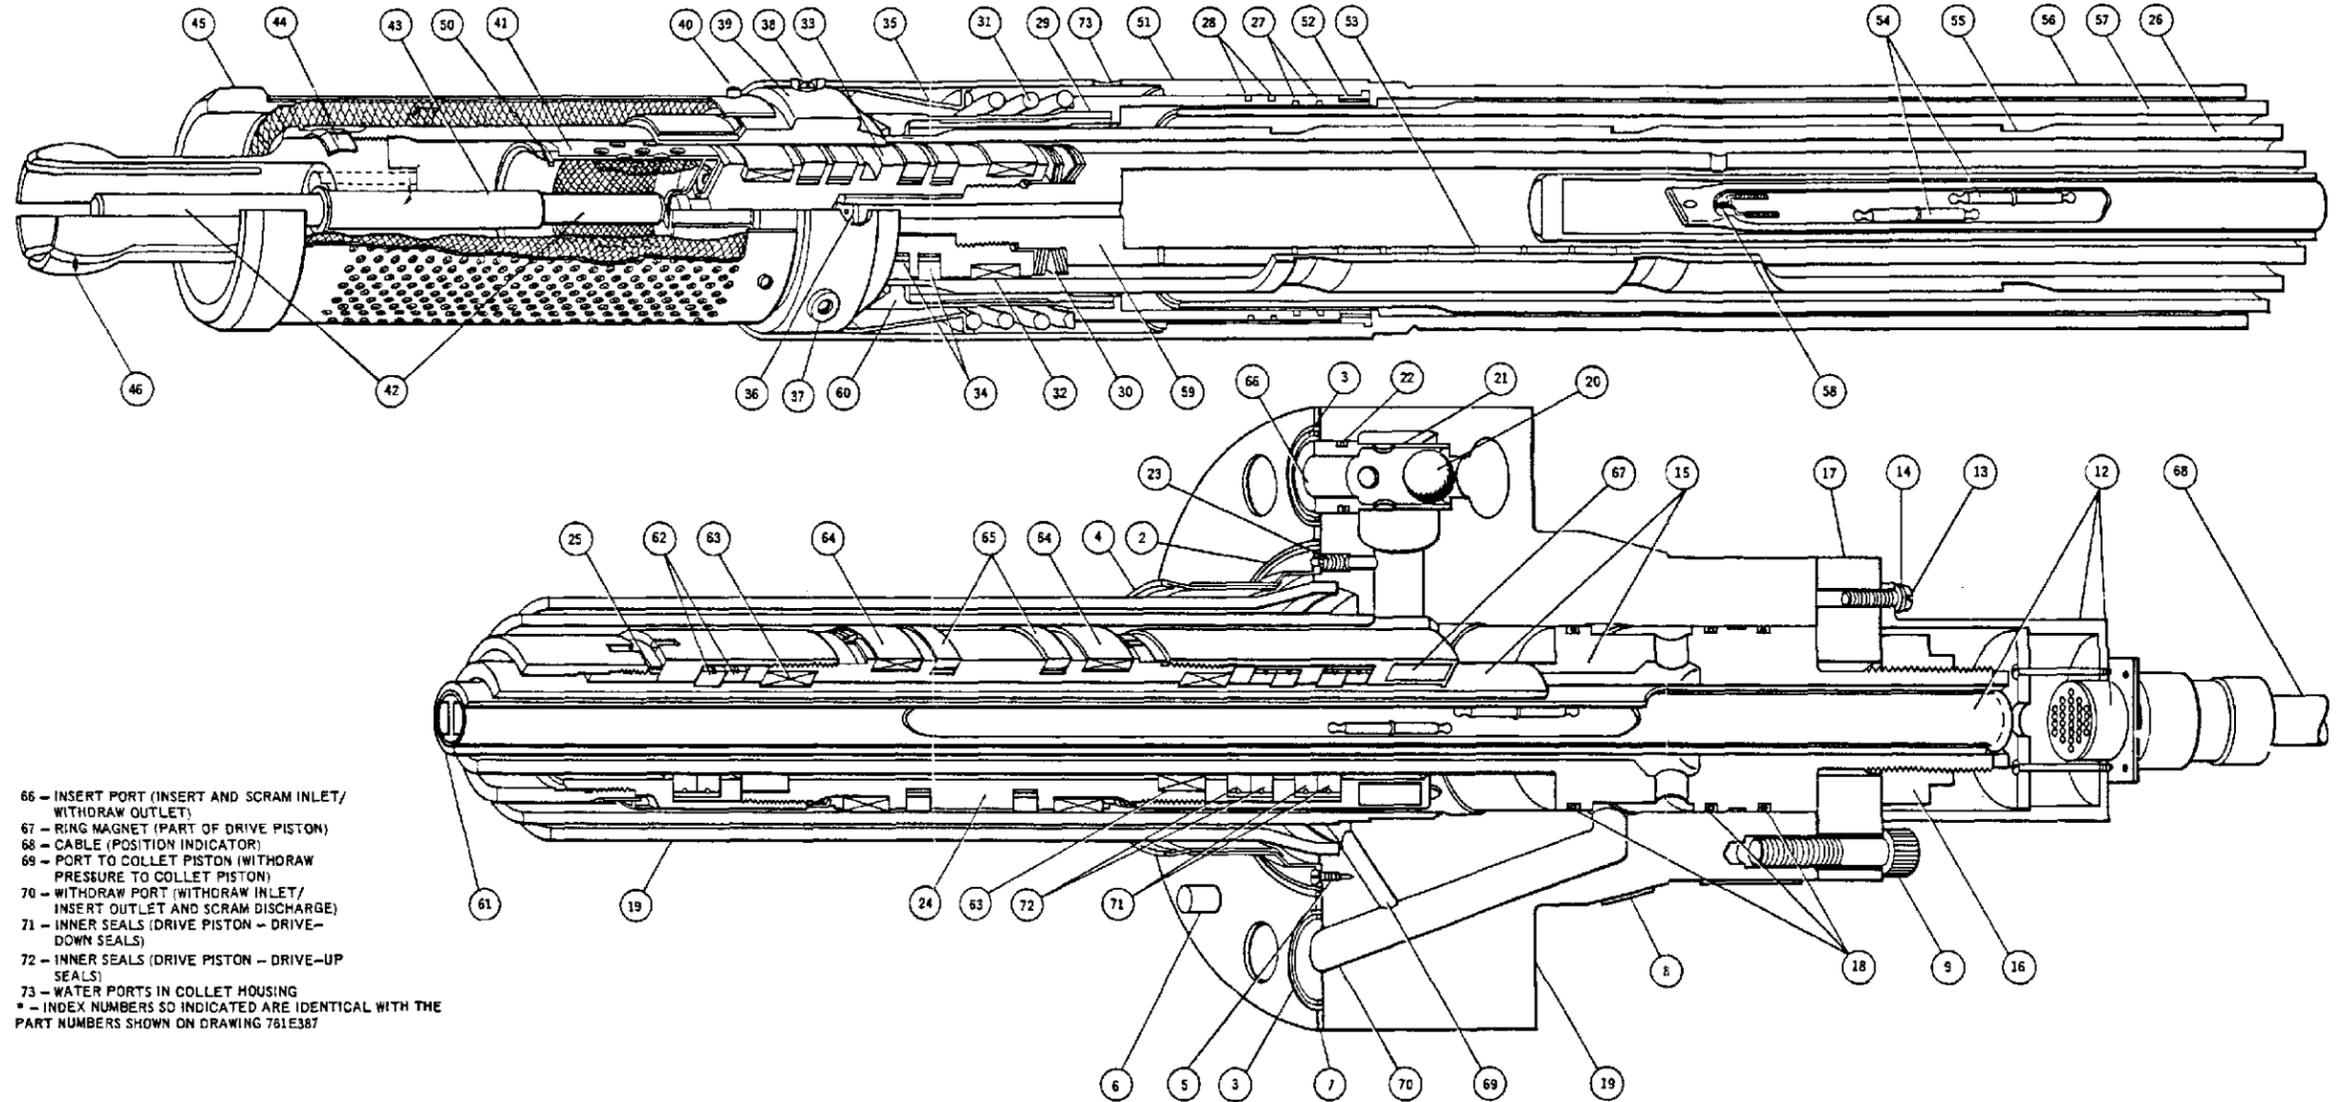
Control Rod Drive Mechanism Isometric
